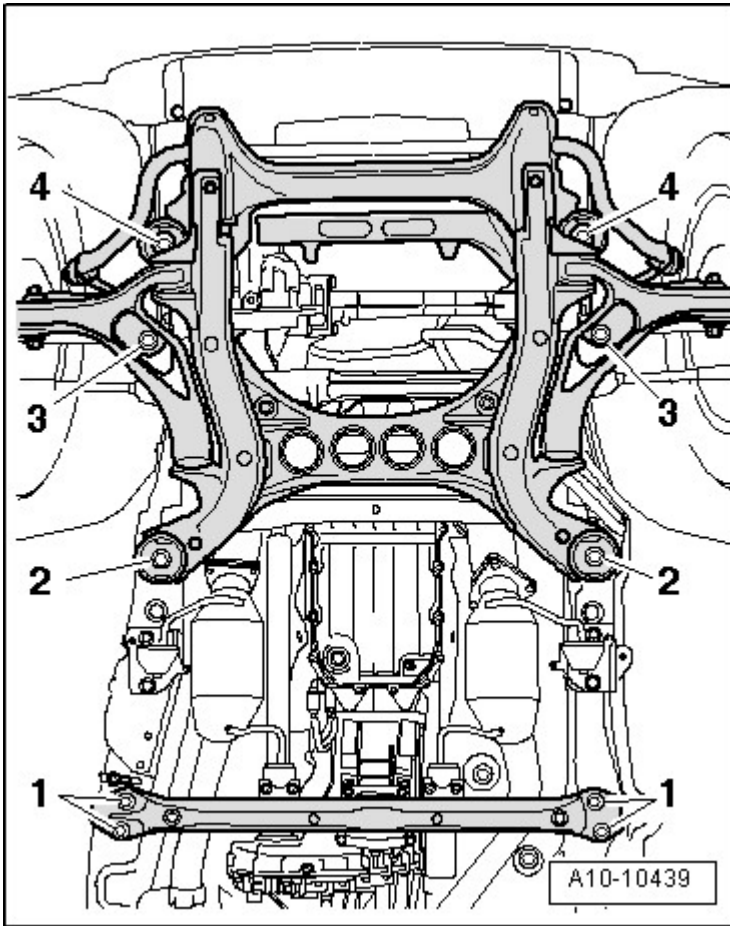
Identifying Bolts -4- And Engine Carrier Bolts -3-
